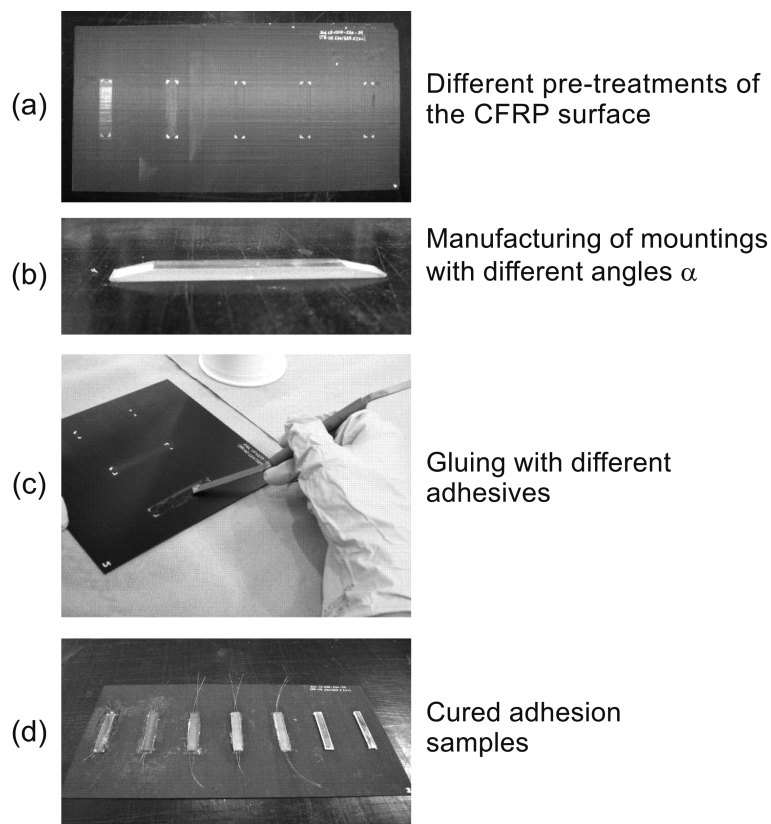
Manufacturing process for adhesion samples: (a) Surface treatment; (b) Patch mounting; (c) Gluing process; (d) Cured samples.
